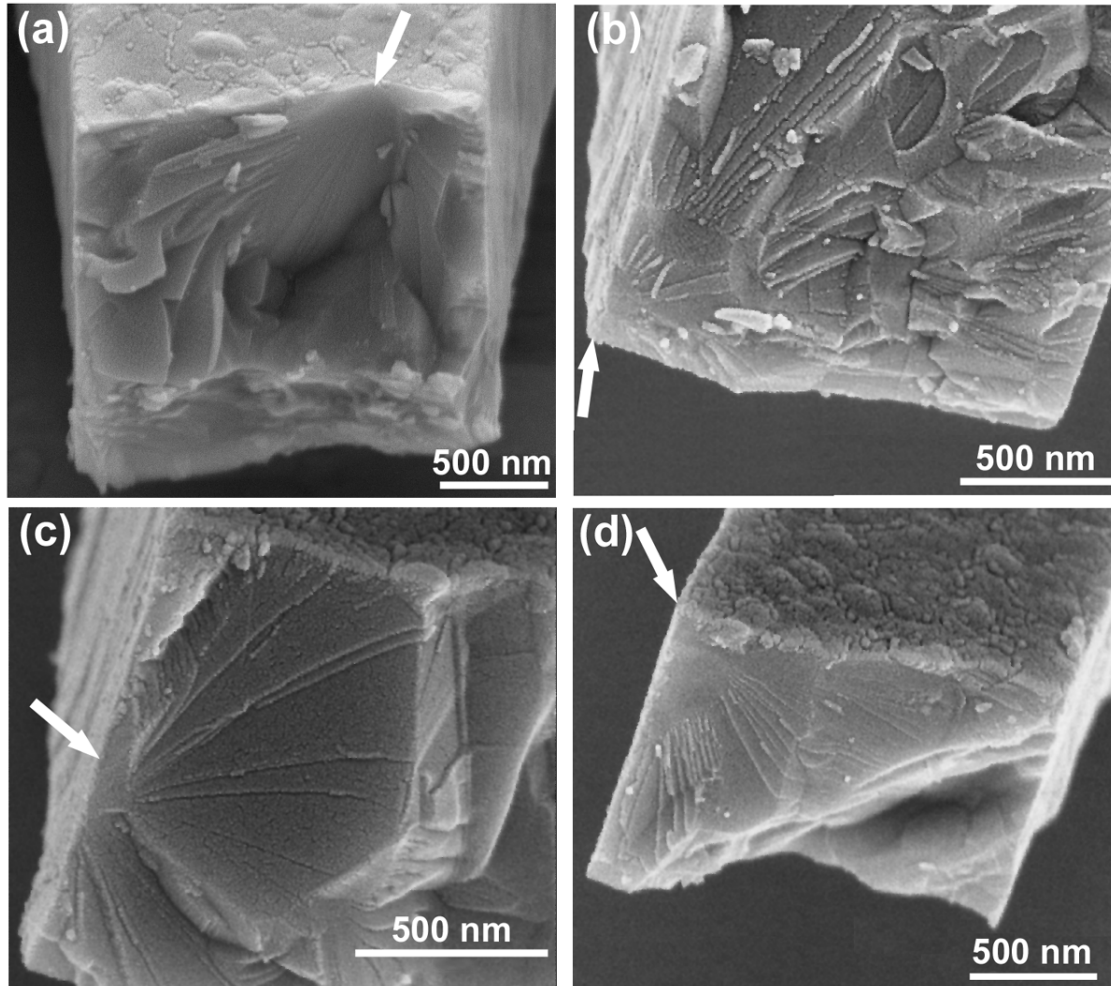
Fracture surfaces from poly21 (a and b), and poly2 (c and d) showing apparent evidence of failure origins [arrows] at sidewalls (c), top surfaces (a), and corners (b and d). Many other fractographs had no clearly identifiable fracture origin.
